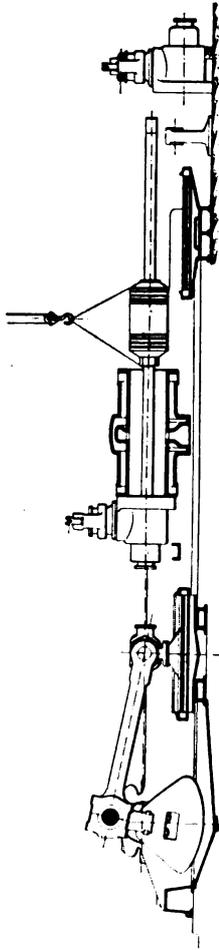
Removal of Piston from back end of ordinary Engine, Siegener.
